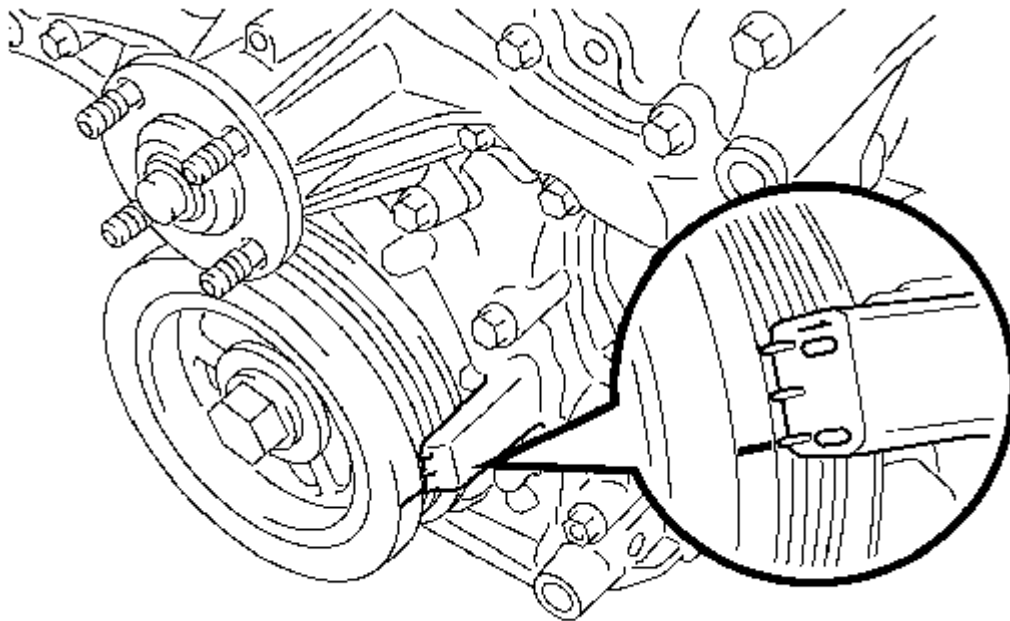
Identifying Hole In Lever & Hole In Tensioner Body
